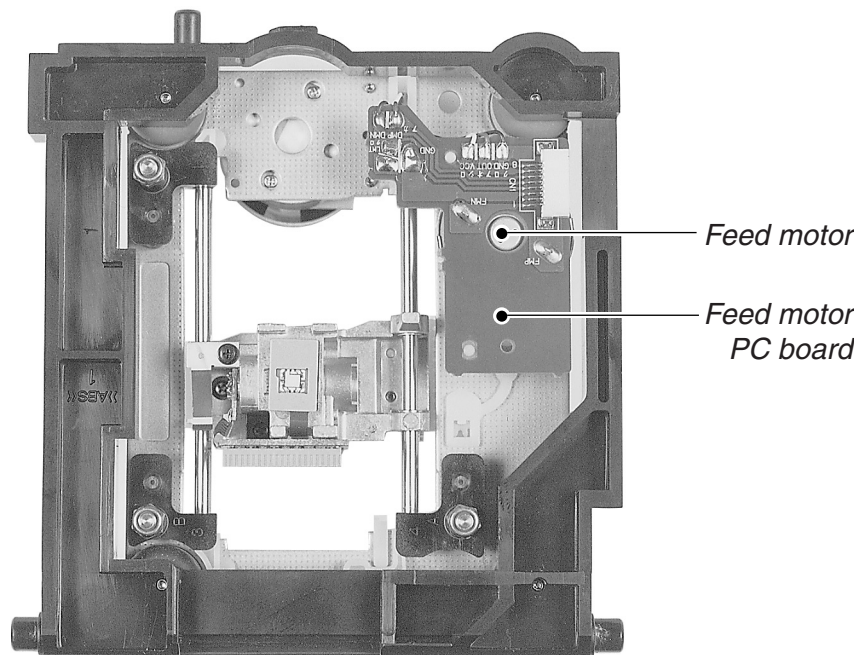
Pickup mechanism chassis assembly (Bottom side)
